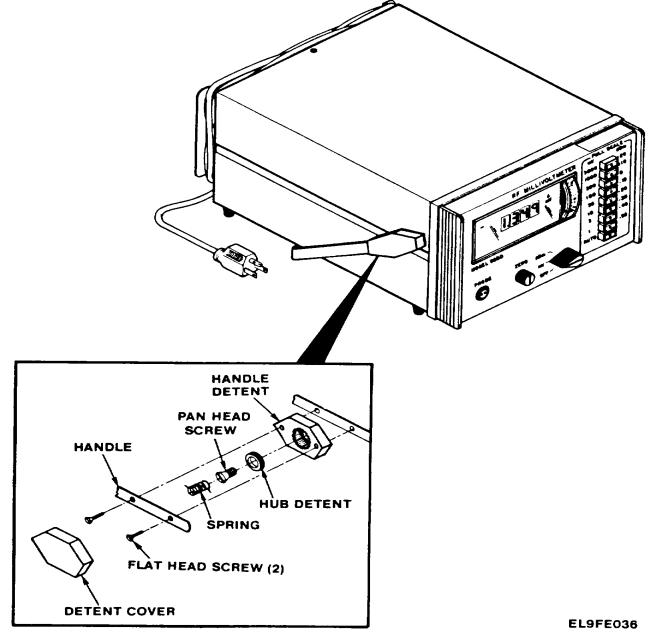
Replacement of Handle Assemblies, ME-526A/USM.
